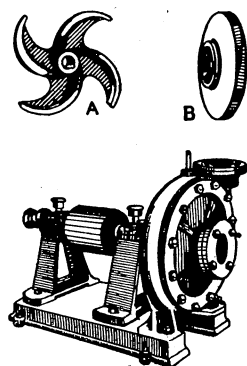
A centrifugal pump showing both open type (A) and closed type (B) of impeller
